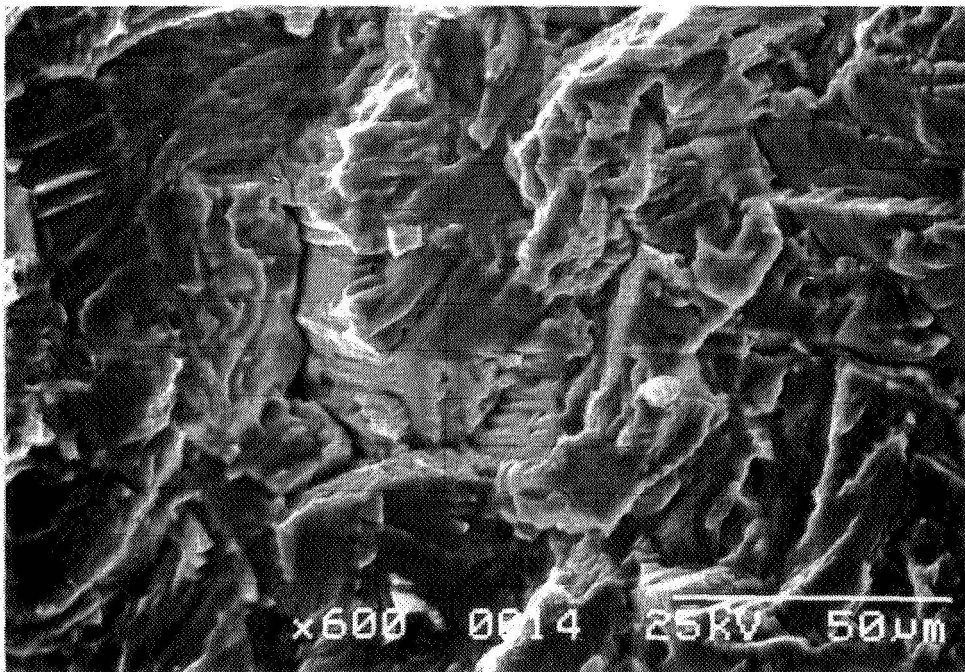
More secondary cracking on the fracture surface of the Disk specimen tested at 0.065 hertz (Dwell) (600X).
